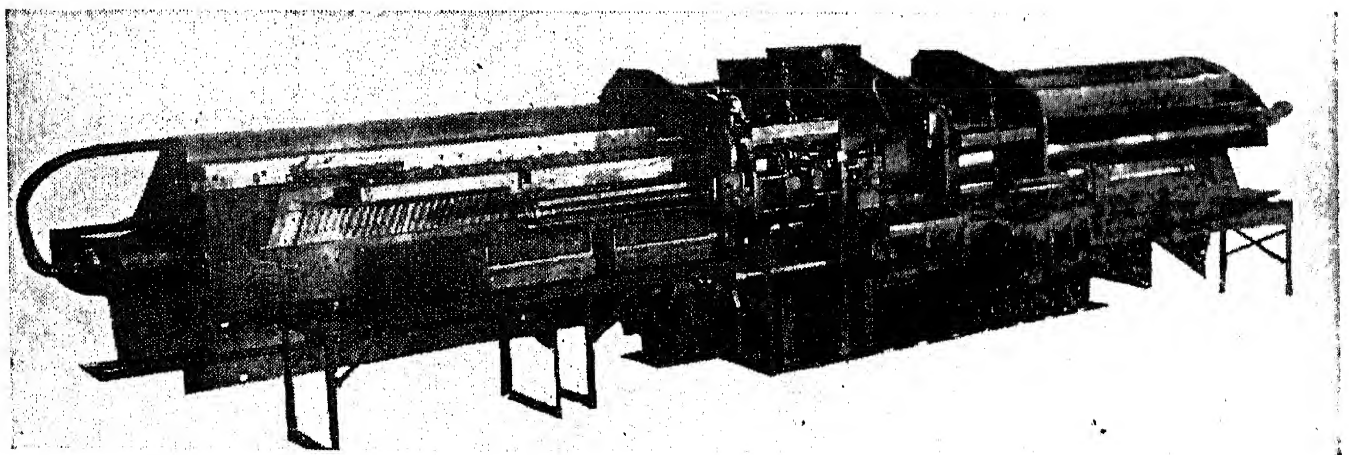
A 25 ton horizontal double acting horizontal surface broaching machine for finishing the bottom, top, valve chamber cover face, and distributor pad on a six cylinder engine block at the rate of 60 blocks per hour. (Courtesy The Cincinnati Milling Machine Co.)
